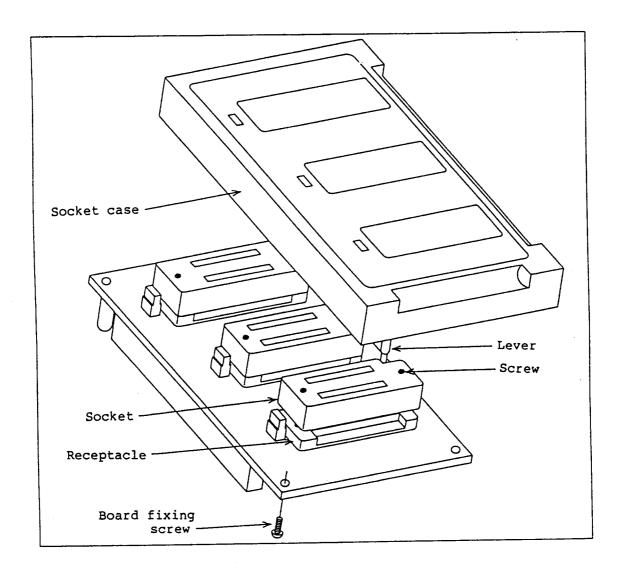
1 Deal drawing of the socket adapter (R49451A)
